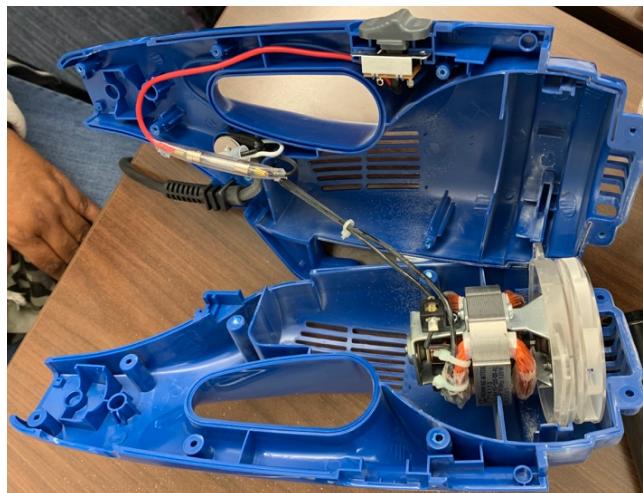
Obsolete objects included a hand-held vacuum cleaner
